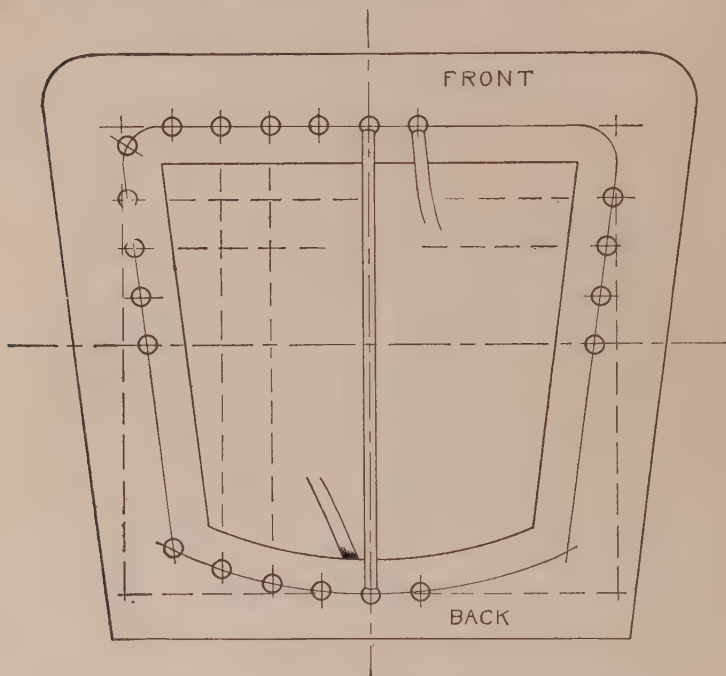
SKETCH OF CHAIR SEAT OF ODD SHAPE, SHOWING METHOD OF FINDING LOCATION OF HOLES
